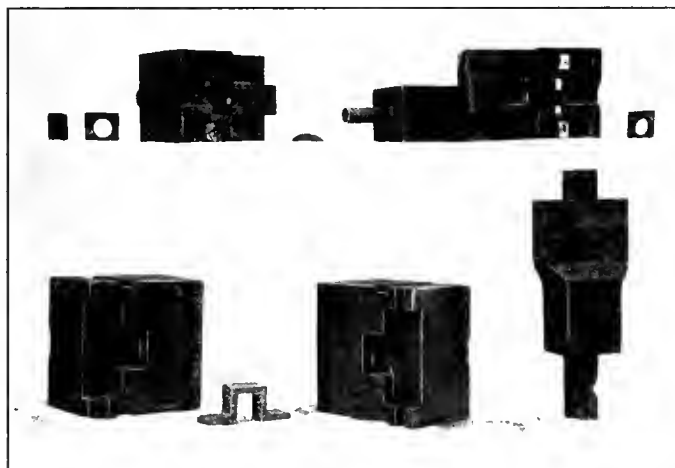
DIES AND HEADERS FOR MAKING WASHERS AND A SIMPLE FORM OF BUCKLE.
